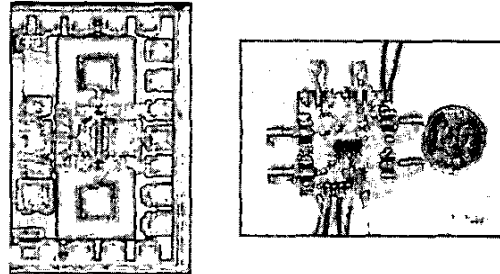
(a) Die-photograph of quadrature VCO (b) Test package on PCB
